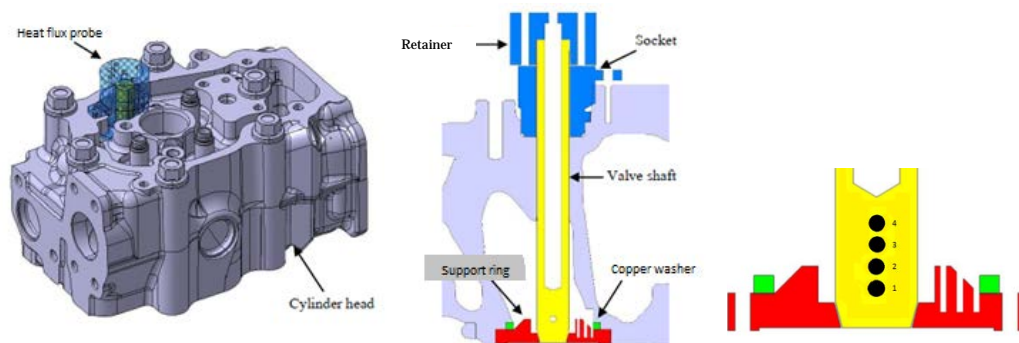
A heat flux measurement device positioned in one of the intake valves of a single-cylinder diesel engine. The coating to be tested is applied onto the lower surface of the shaft; adapted from Kianzad [92].
